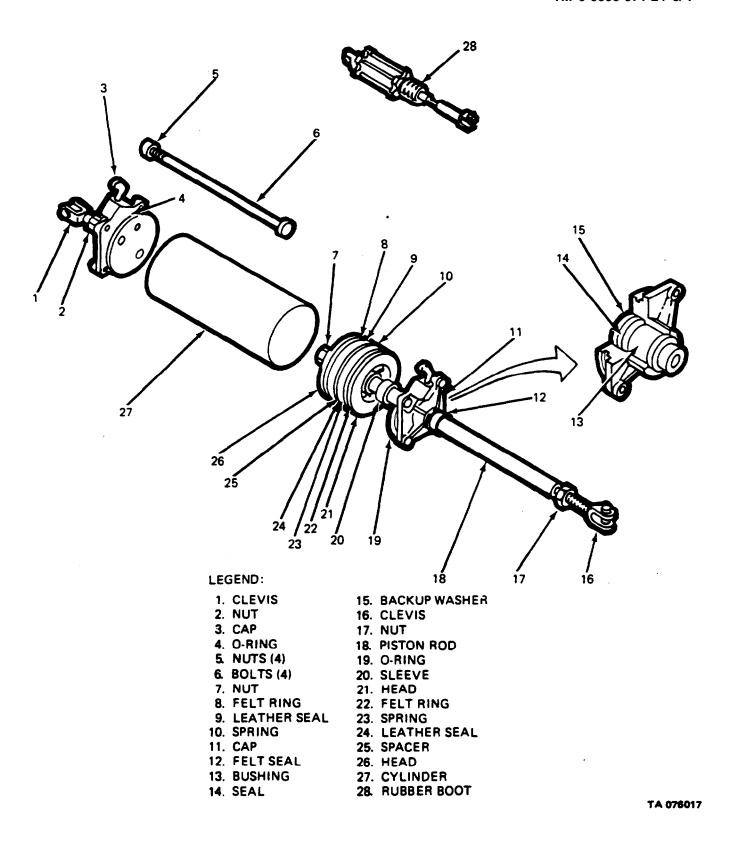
Disassemble/Assemble Bar On-Off Cylinder.
